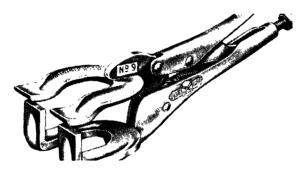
A special clamping and aligning pliers. The two pairs of jaws (one side has deep bends) enables the pliers to clamp, hold, and align weldments during welding
